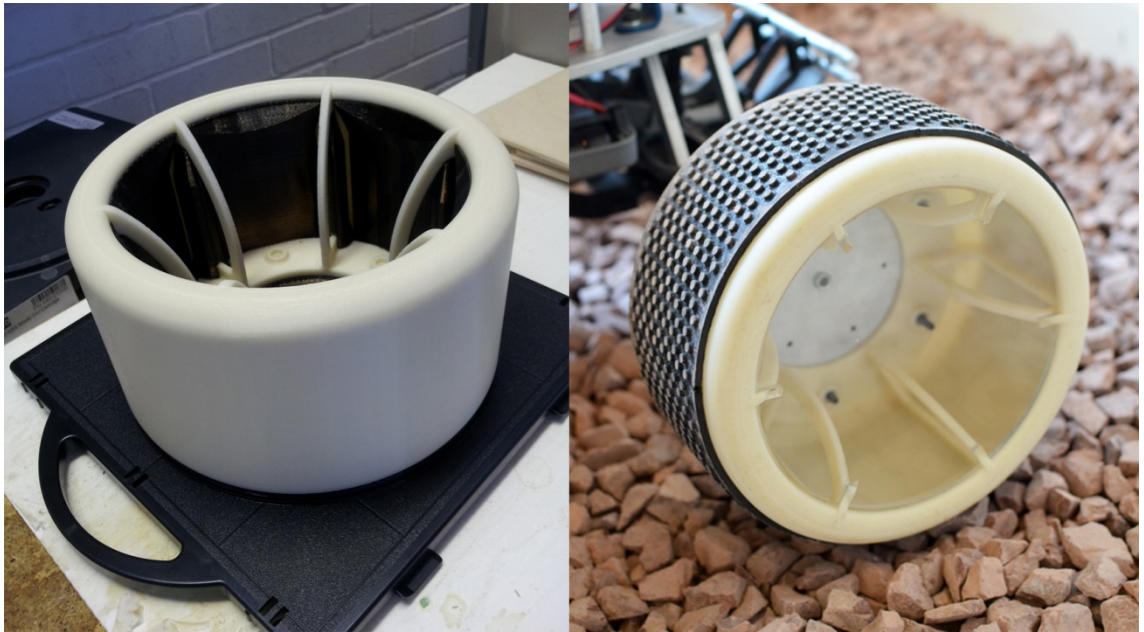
Dummy wheels installed on the platform. Three dummy wheels were designed and manufactured using the 3D printer and included tread with similar properties to the FSW Sensor Units.
